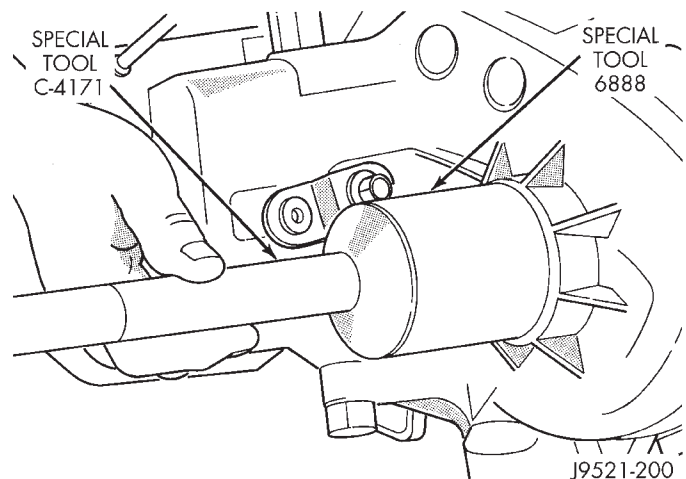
Starting Front Output Shaft Seal Into Case Bore
